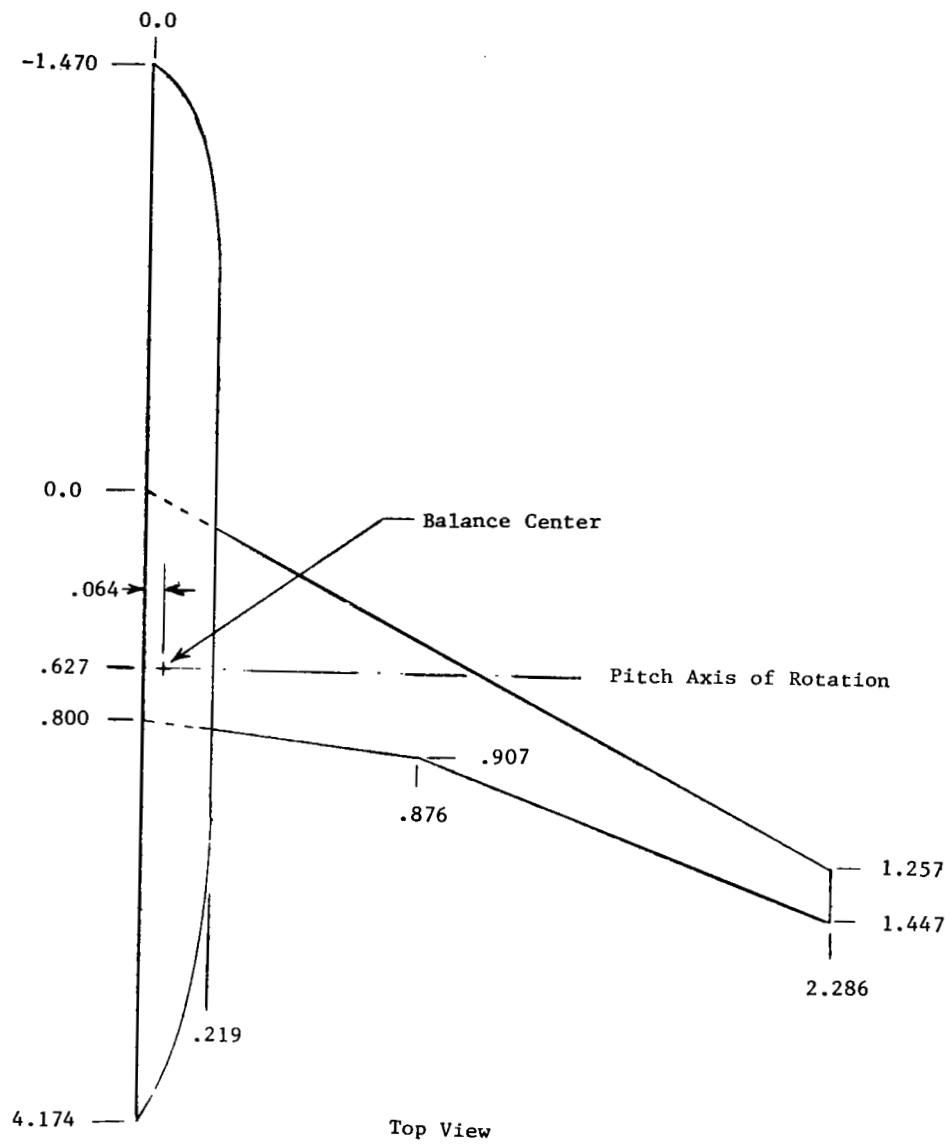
Sketch of wing planform. Linear dimensions in meters.
